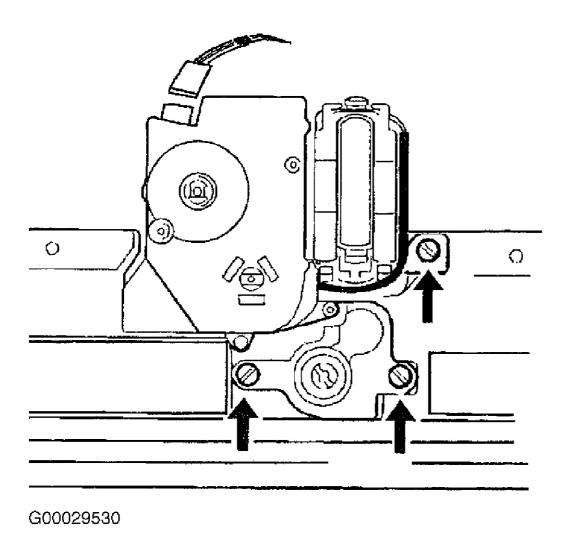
Removing & Installing Sun Roof Motor Courtesy of GENERAL MOTORS CORP.
